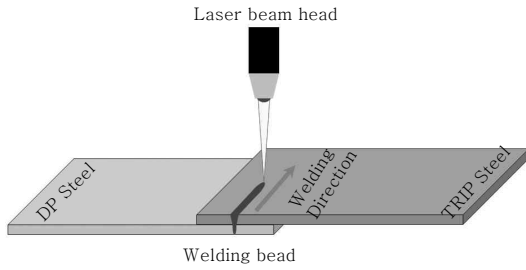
A schematic diagram for fiber laser welding process
